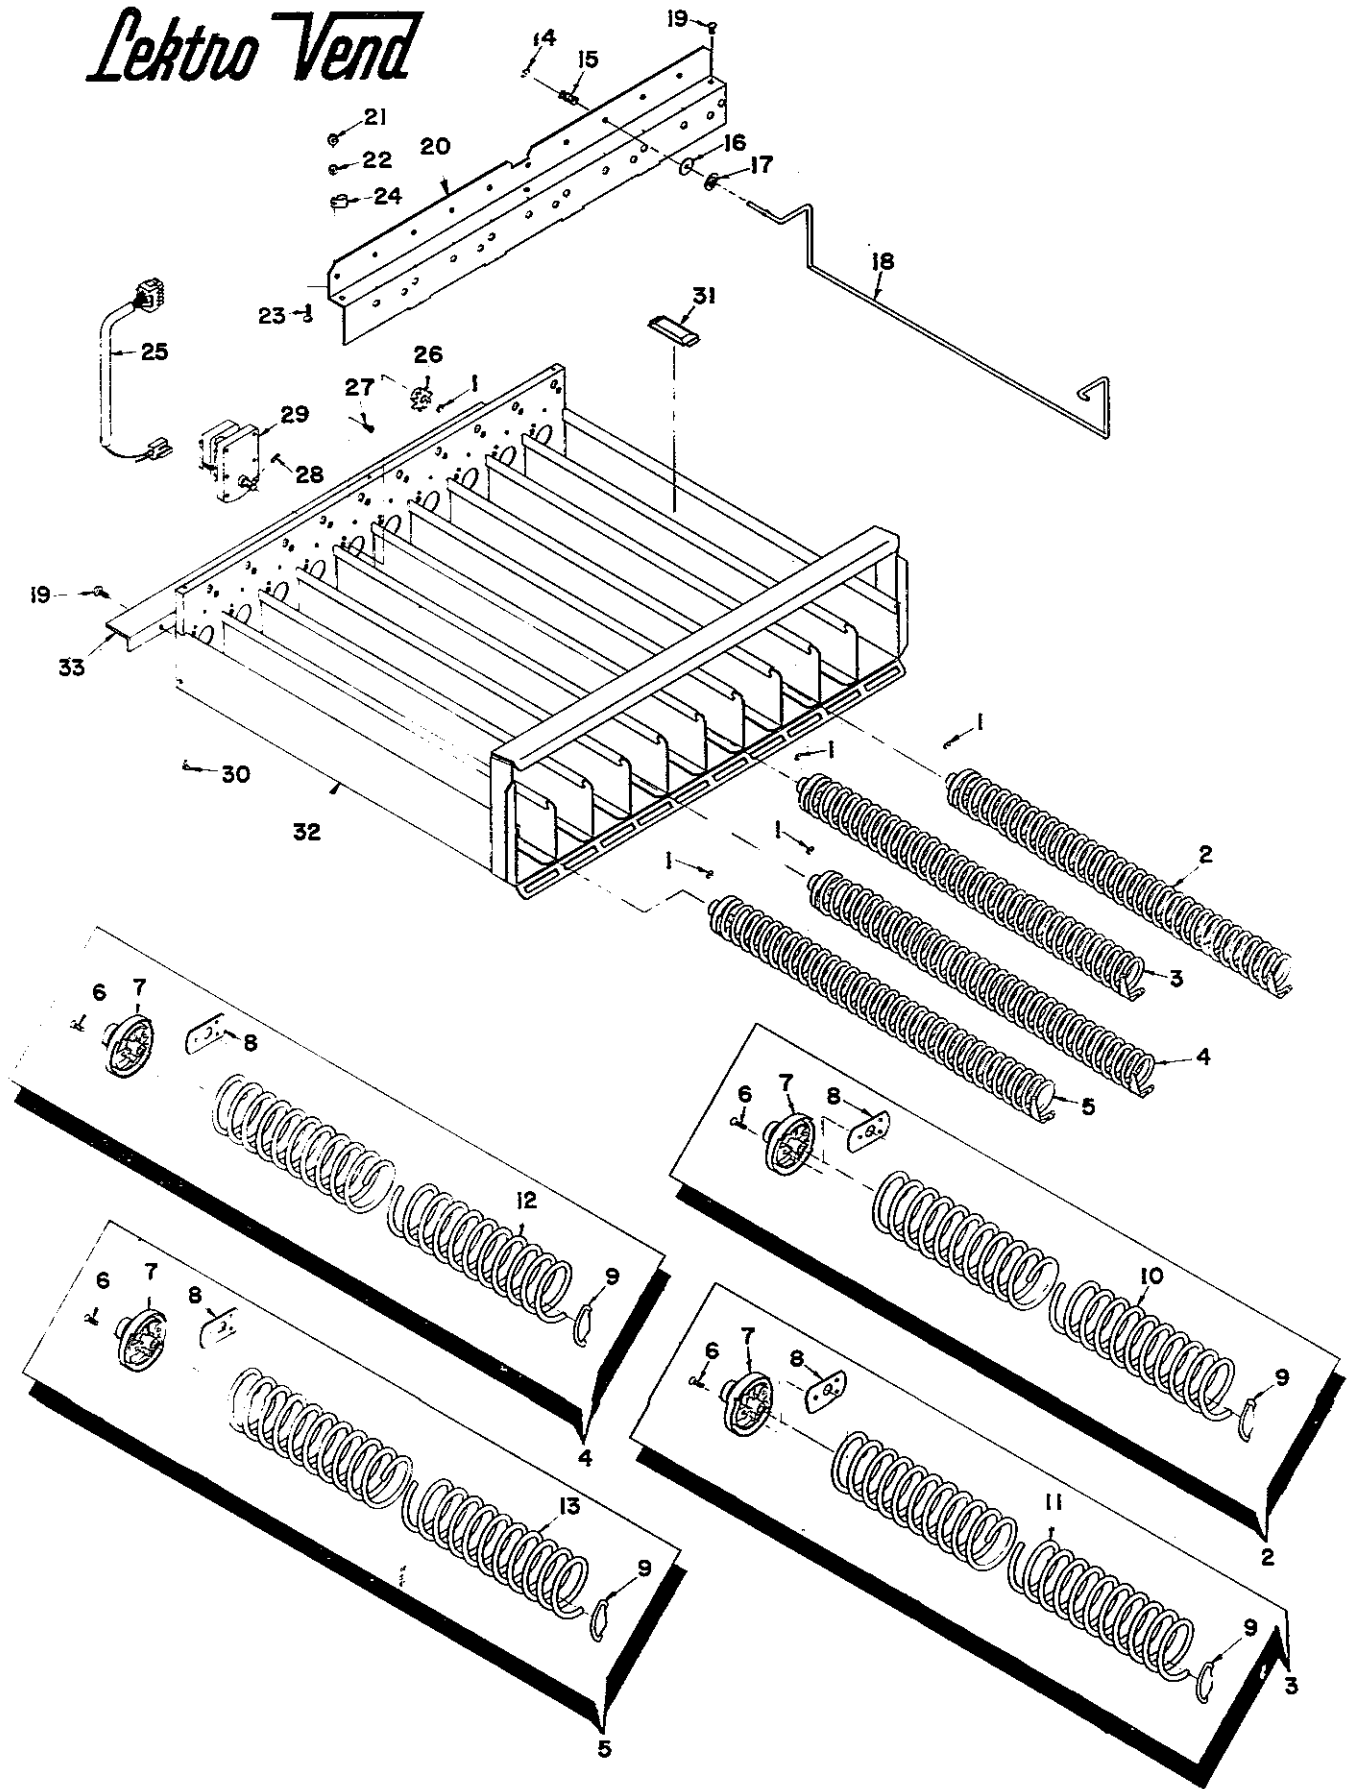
TRAY ASSEMBLY COMPLETE -- 10 COLUMN
